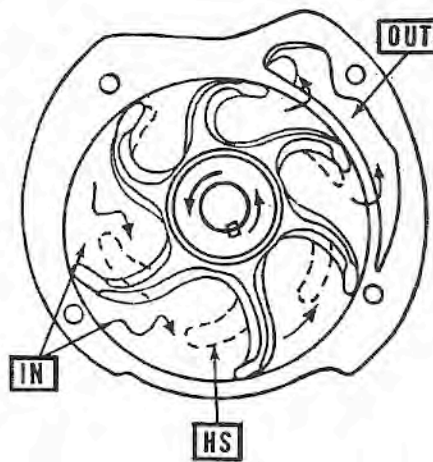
Schematic view of rubber impeller type water pump showing method of operation. The offset housing and flexing impeller blades causes pump to operate by positive displacement at slow speeds. At high speeds, impeller blades remain curved (HS) and pump operates by centrifugal action.
